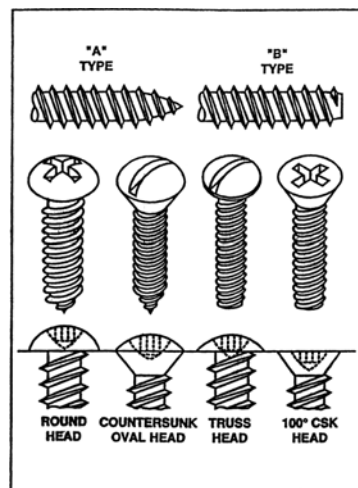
, Self-tapping sheet metal screws are useful for attaching trim and upholstery.
